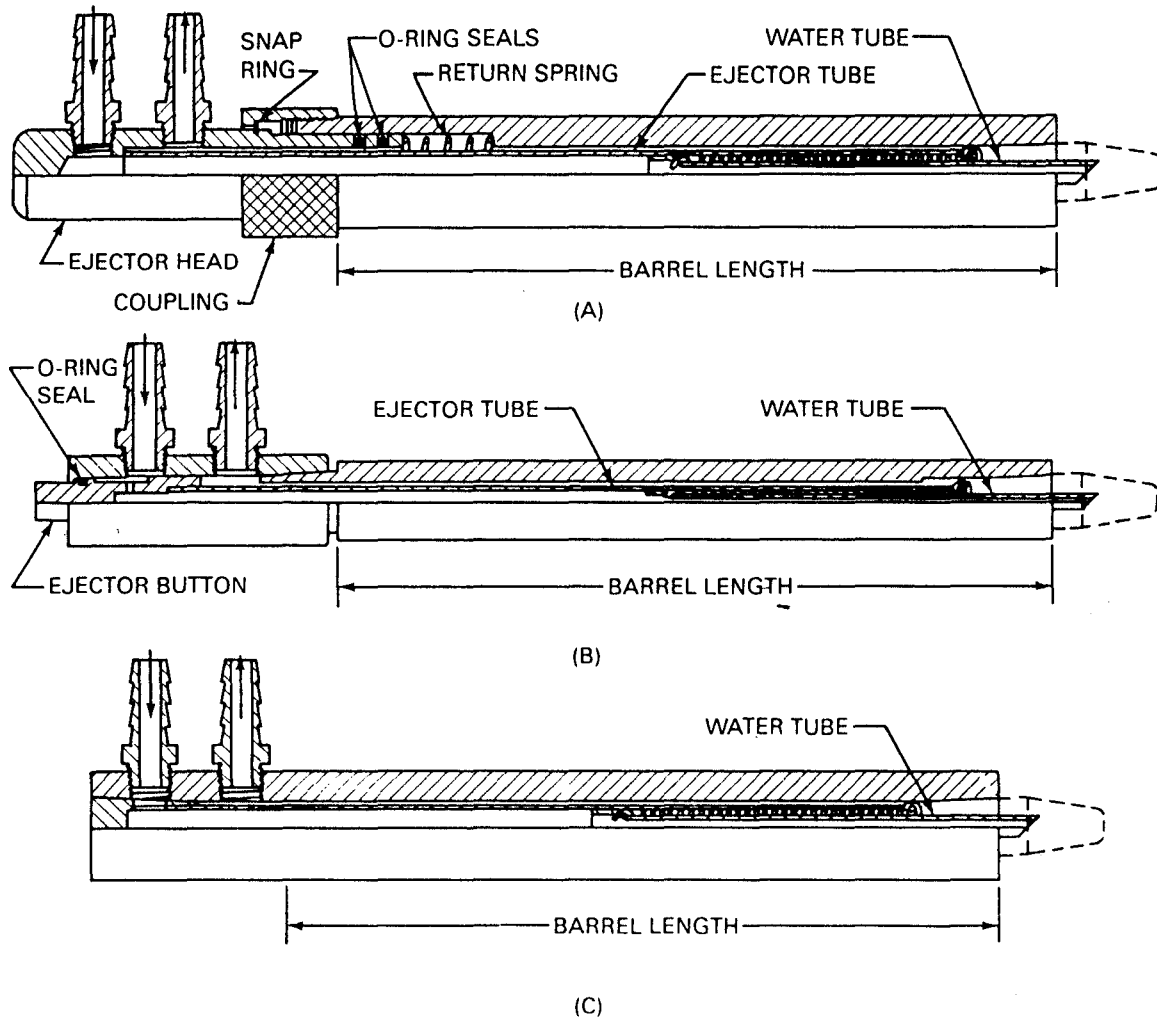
Typical Straight Spot Welding Electrode Holders: (A) and (B) Ejector Types, (C) Nonejector Type
